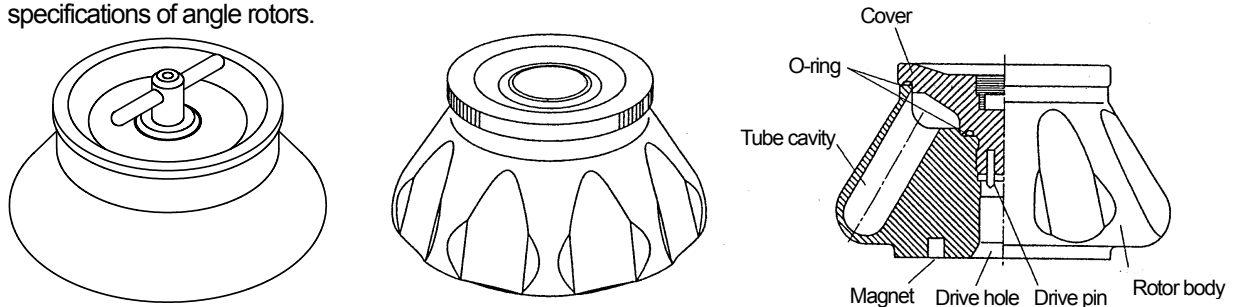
Appearance and part names of quick-setting type angle rotor
